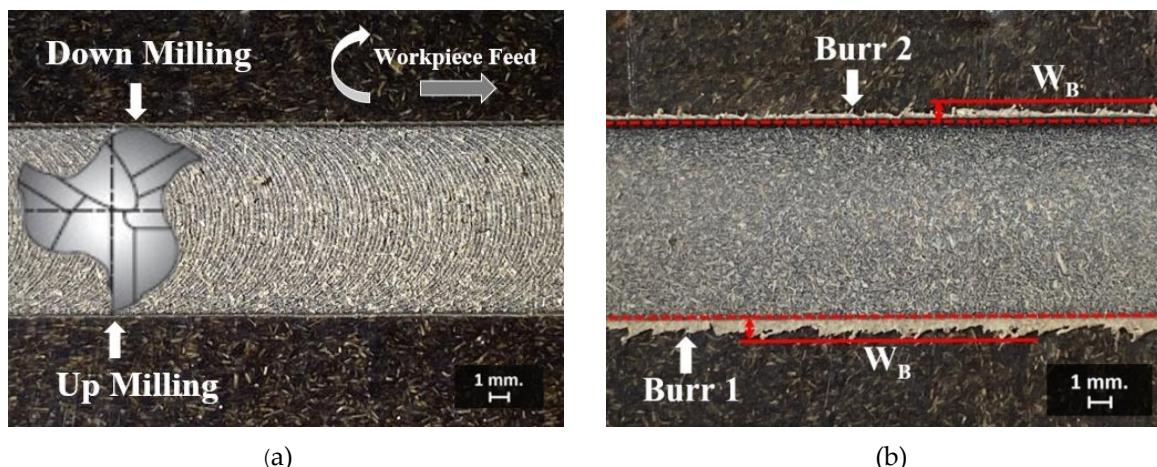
Characteristics of slot milled workpiece: (a) Negligible burr formation and (b) burr formation [12].
